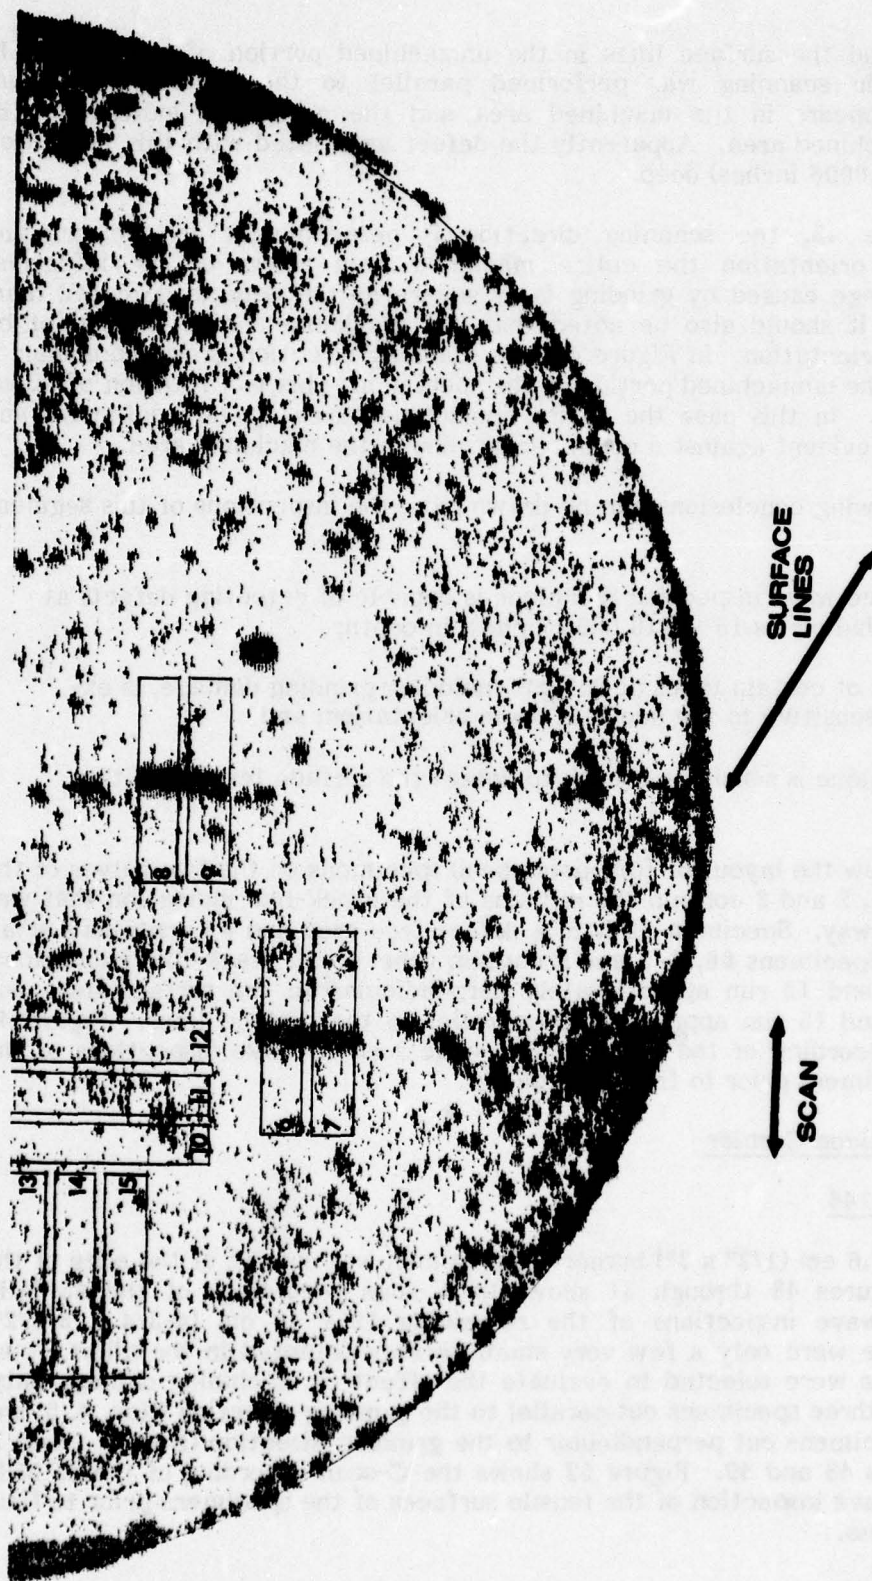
Layout of Four-Point-Bend Specimens on Bottom Surface of Unmachined Segment of Billet of NC-350 RBSN.
